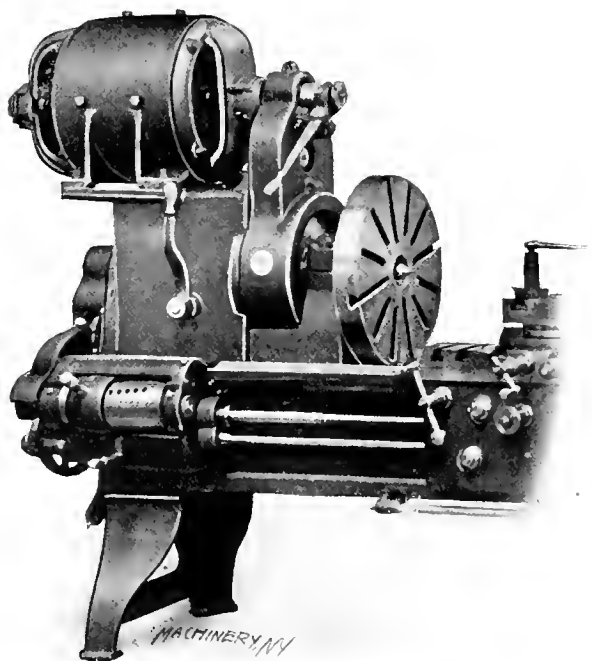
Variable Speed Motor with Double Back Geared 20-inch Lathe.
